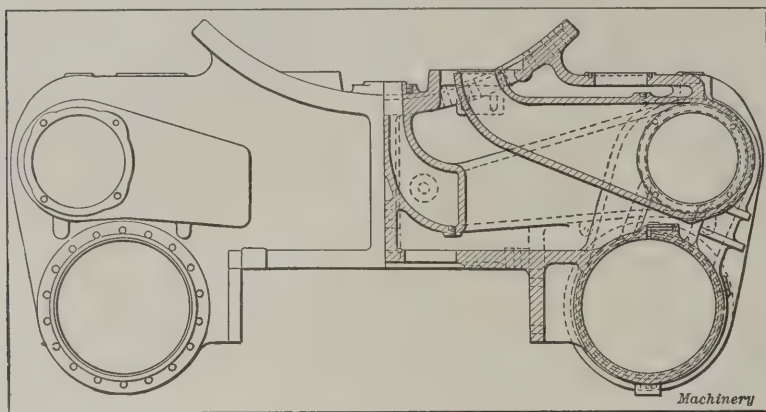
Front View of Locomotive Cylinders of the Single-expansion Piston Valve Type
